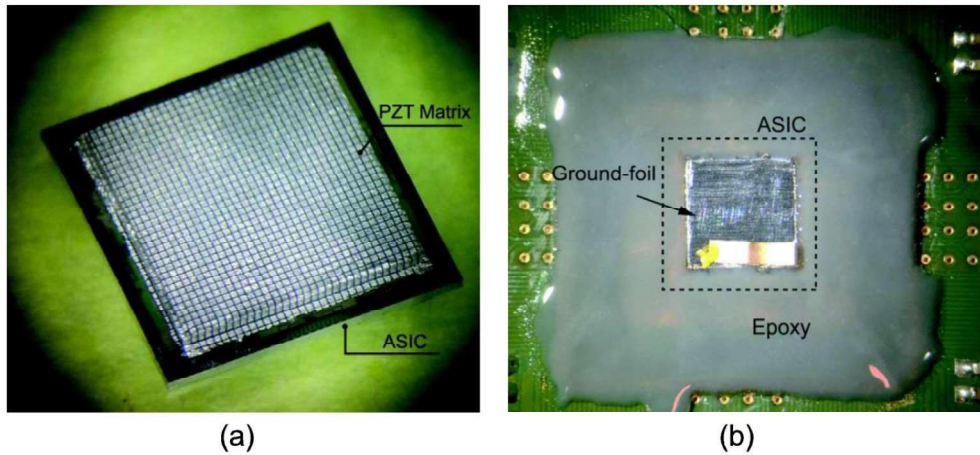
(a) Photograph of a prototype ASIC with integrated 32×32 PZT matrix; (b) A prototype bonded on a daughter PCB for acoustic experiments.
